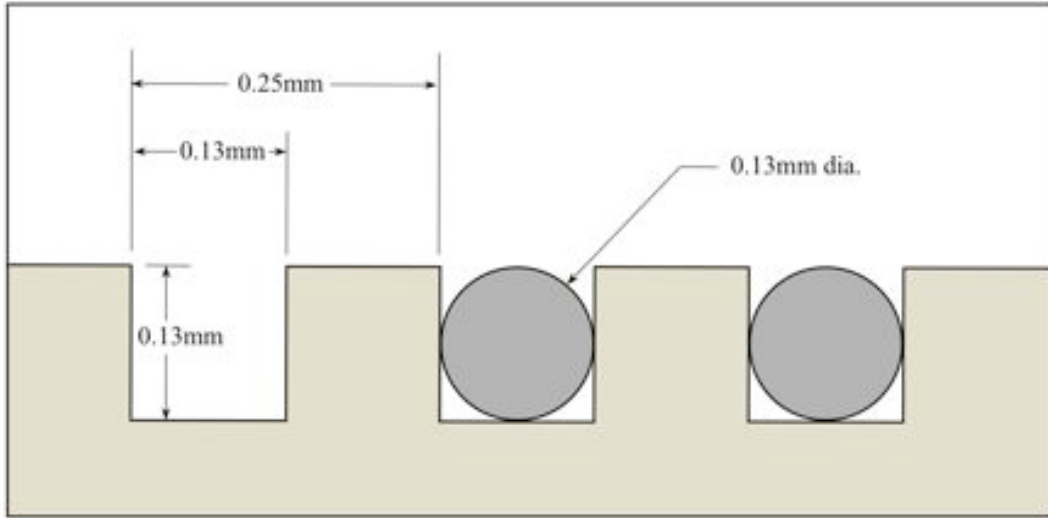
Cross section of wires in grooves on cylindrical detector.
